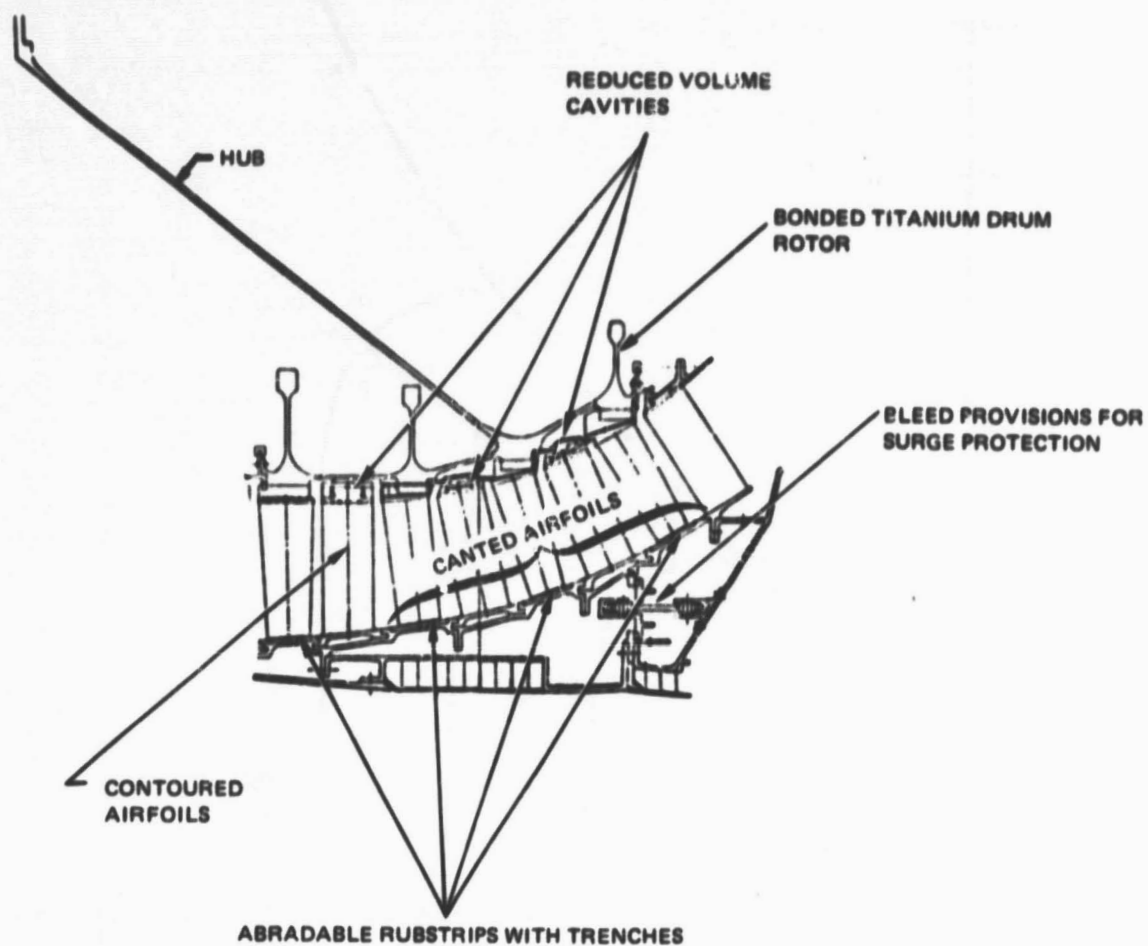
Low-Pressure Compressor Preliminary Design. Cross-section view provides identification of components.
